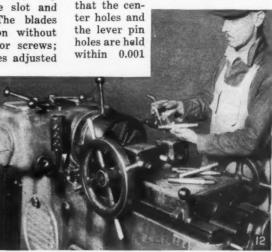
With this "Landmaco" threading machine, main bearing studs $7\frac{1}{2}$ in. long and with two inches of $7\frac{1}{2}$ -in. thread on each end are threaded within 0.0005 in. of size on the pitch diameters and so that the threads are perfectly true with each other.
